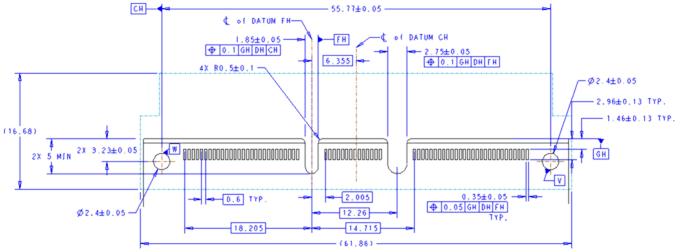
4C STRADDLE MOUNT CONNECTOR FOOTPRINT (MM)
